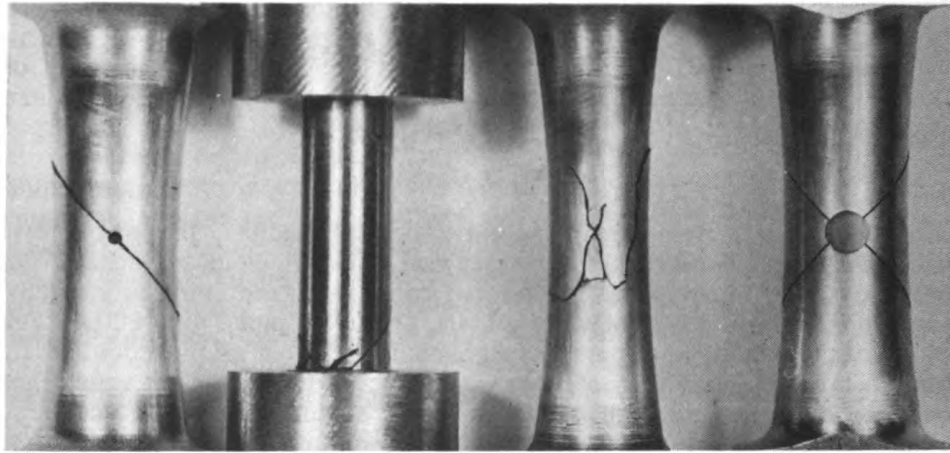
In these typical fatigue cracks in steel specimens subjected to repeated torsions, it should be noted that cracks usually start at holes, or fillets.
